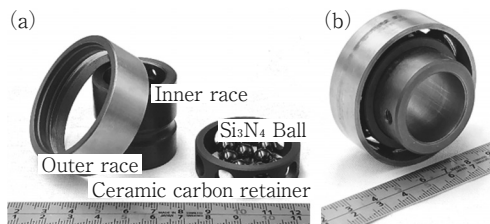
Prototype super heat-resistant ball bearing (a) Before assembly (b) After assembly [出典：文献 1)]
